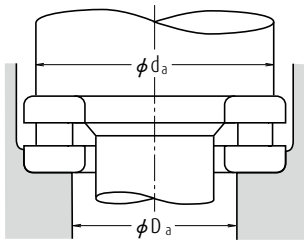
Face Supporting Diameters for Thrust Roller Bearings
